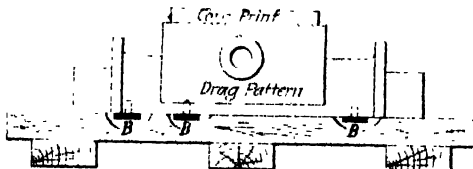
Drag Half of Steam Cylinder Pattern on Pattern Board
